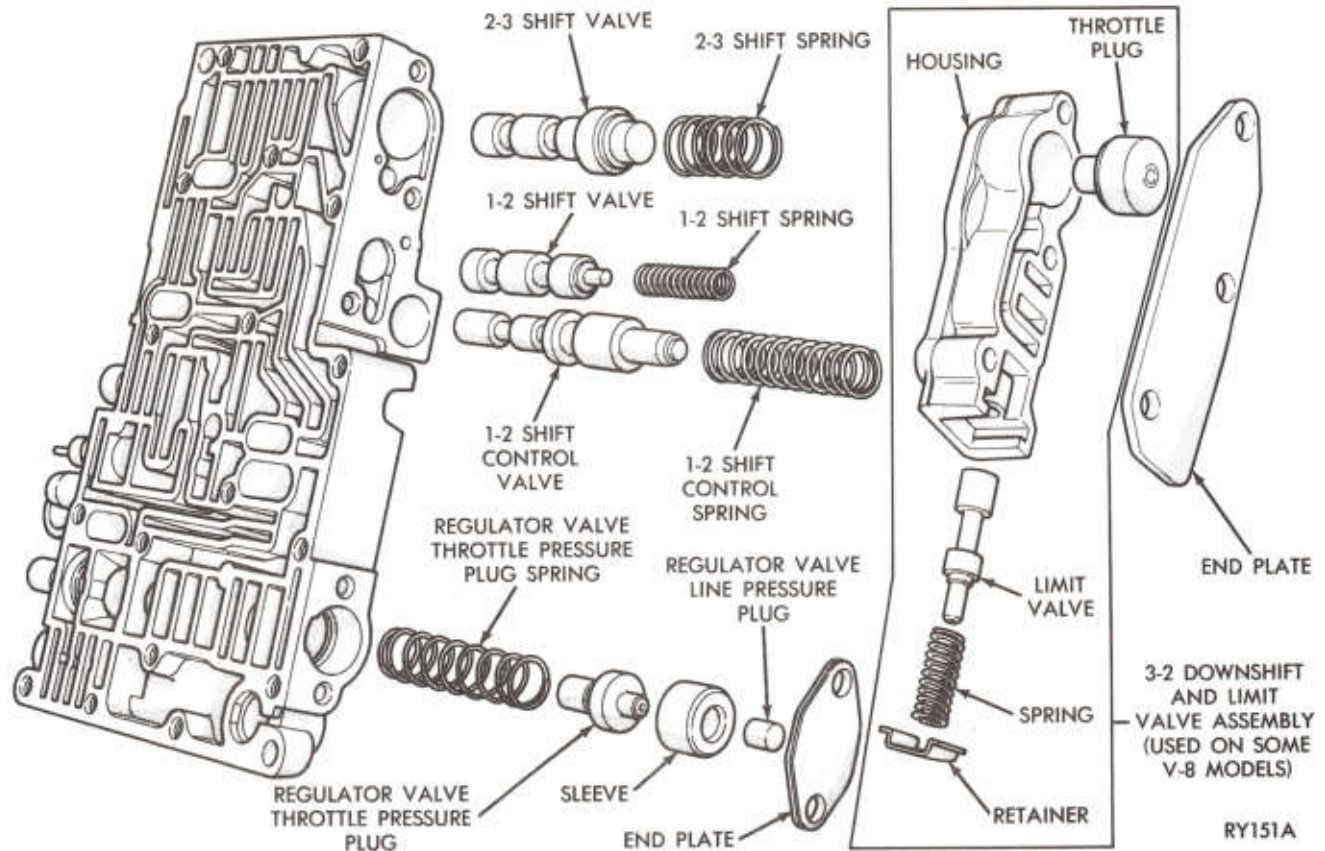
Shift Valves and Pressure Regulator Valve Plugs
